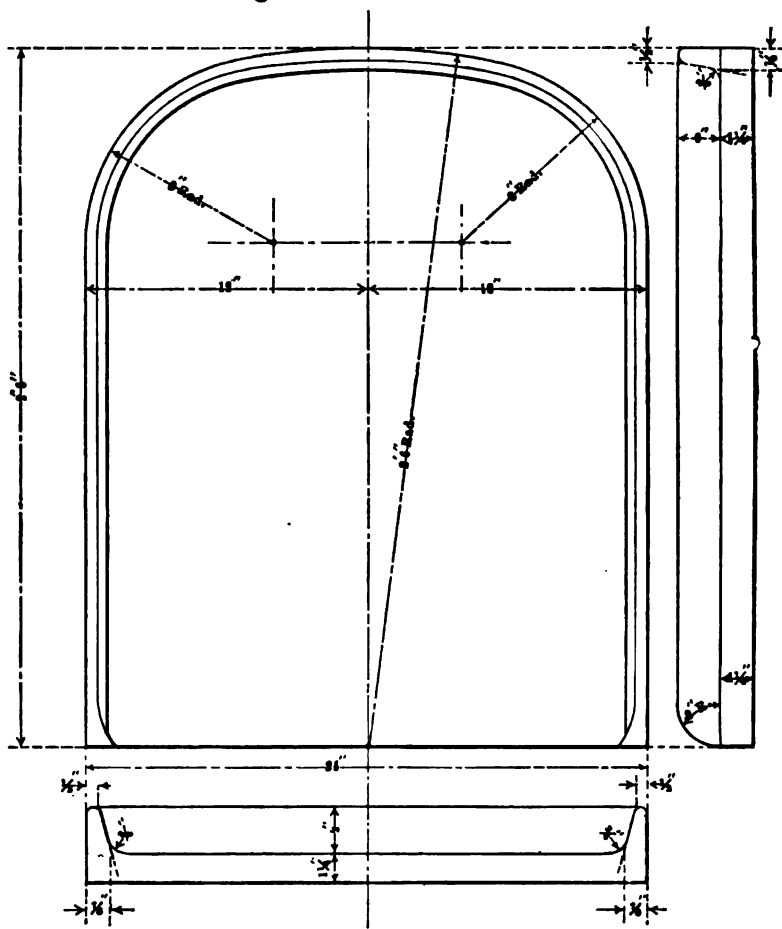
GRINDING-PLATE FOR FINISHING ORE-SAMPLES.
